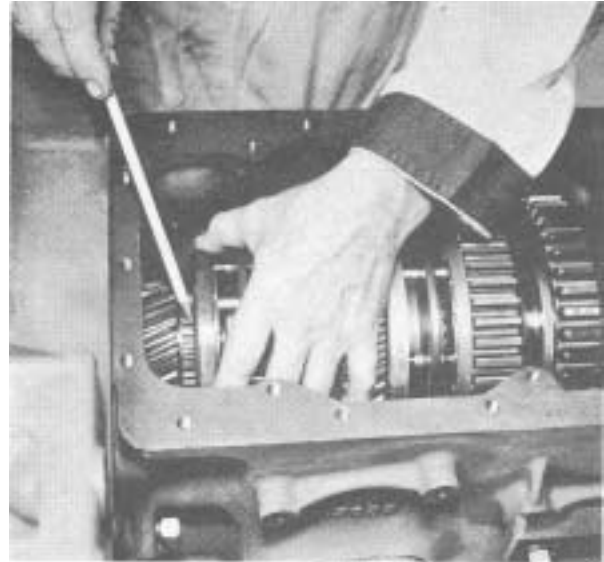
Install main drive gear assembly in transmission case. Clutching teeth on main drive gear must enter 5th speed synchronizer cup without binding.
